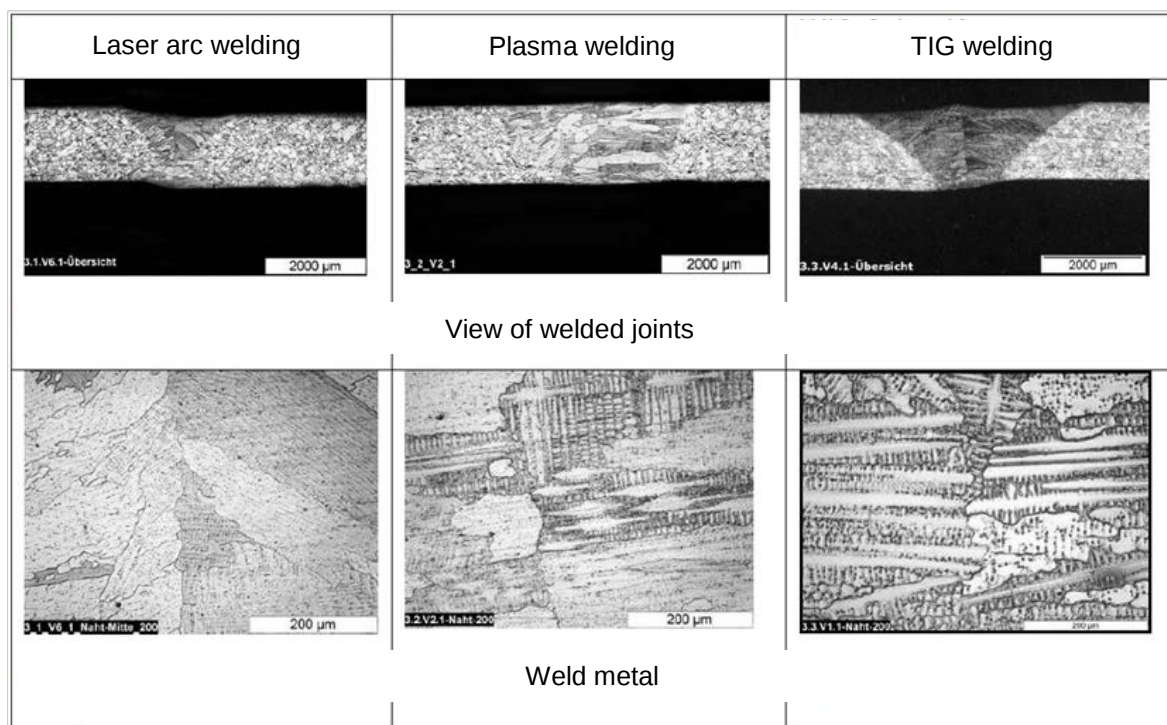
Macro- and microsections of weld joints of Alloy 800H [43]
